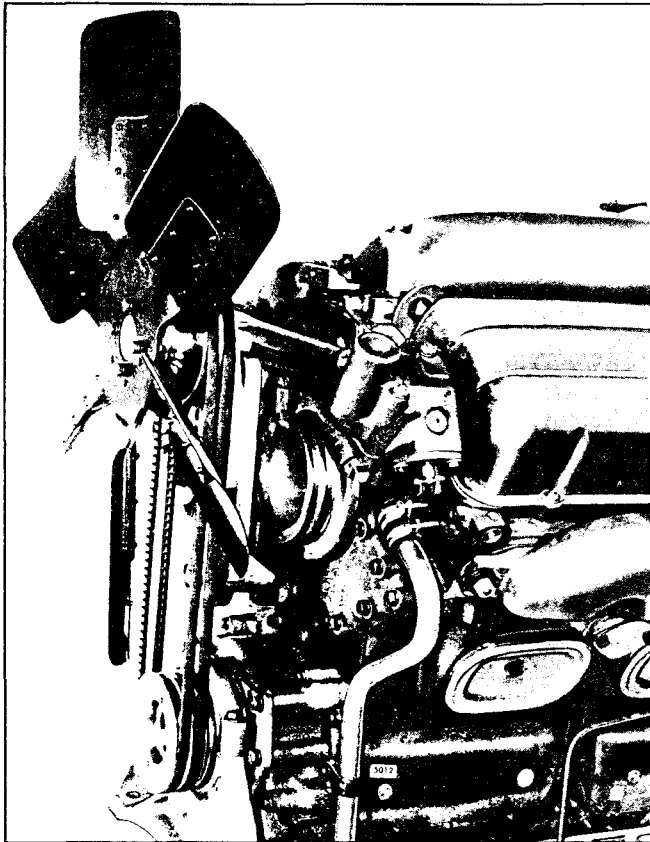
Belt-Driven Fan Mounting (V-Type Engine)
